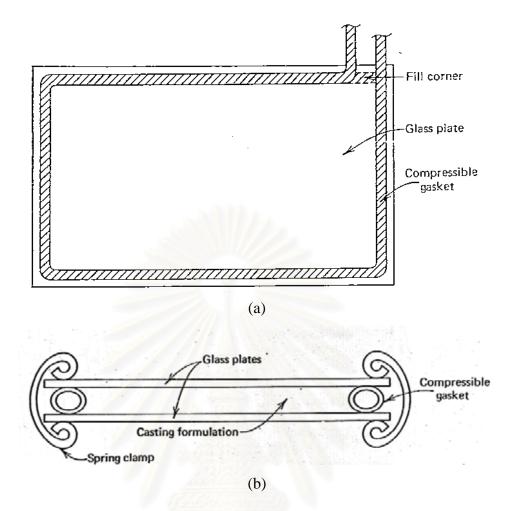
Conventional cell casting mold configuration (a) face view and (b) edge view [7].
